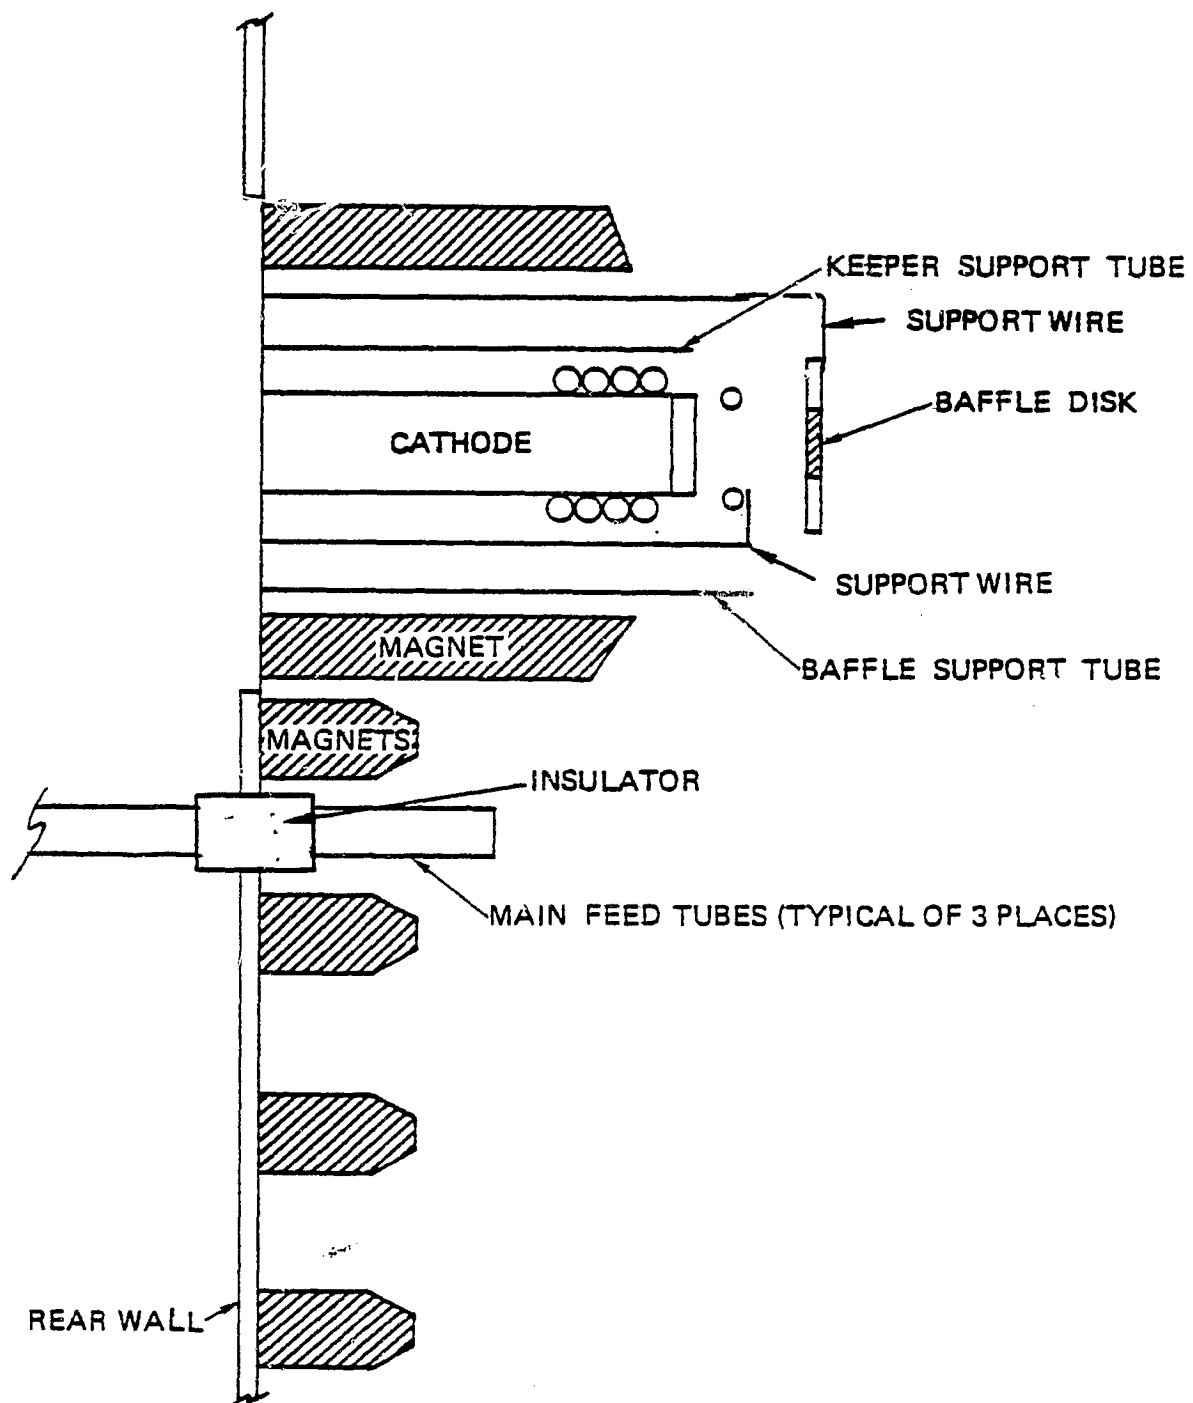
Cutaway Schematic of 3.3 cm Magnet Cathode Subassembly
